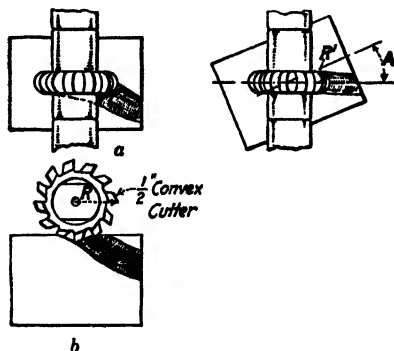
(a) Top view and (b) front view of a spiral groove cut without swiveling the table. If the cutter is $2\frac{1}{2}$ in. in diameter, the radius of the groove is about $1\frac{1}{4}$ in., approximately equal to R , the radius of the cutter. Note in (c), which represents the top view with the table swiveled to the angle of the helix A , that the radius of the groove is $\frac{1}{4}$ in., or equal to R' , the radius of the curve of the cutting edge.
